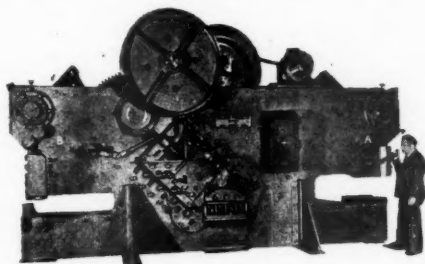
ALL-STEEL HEAVY-DUTY PUNCHING AND SHEARING MACHINE
